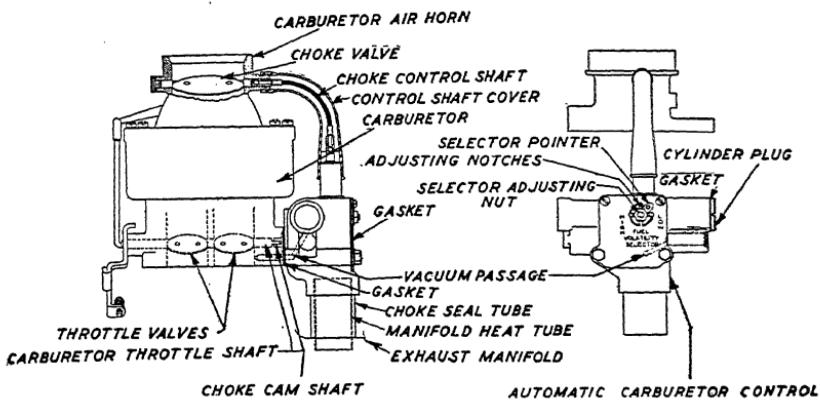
Delco-Remy Automatic Opposed Piston Type Carburetor Control
